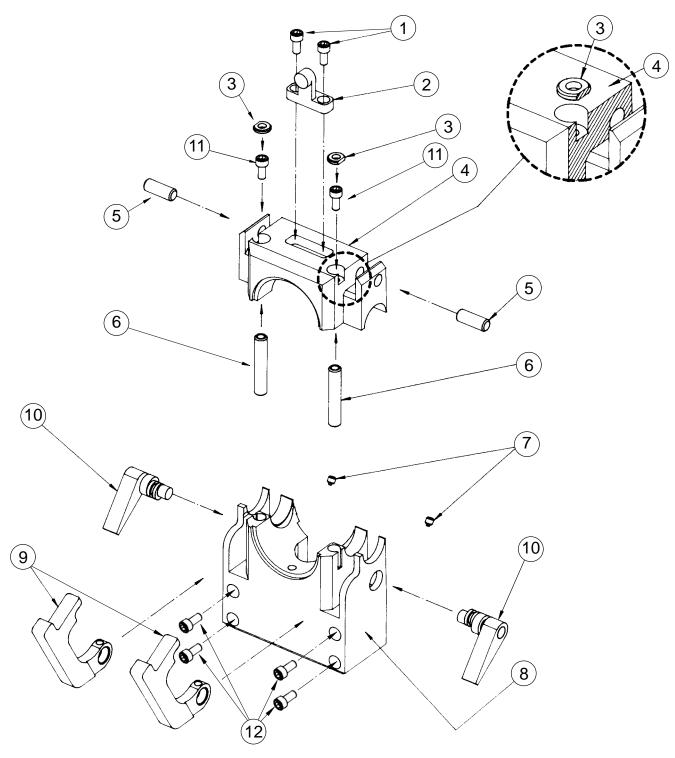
CWS-5FSP2 Special Purpose Fixture Block
